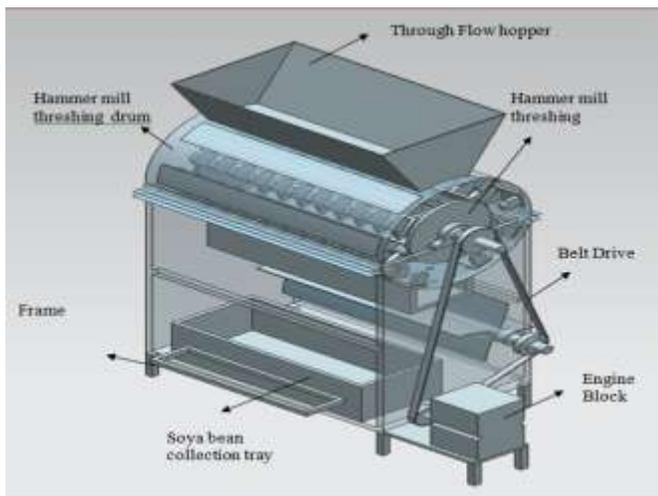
Through flow, Hold on type, hammer mill Soybean threshing machine
